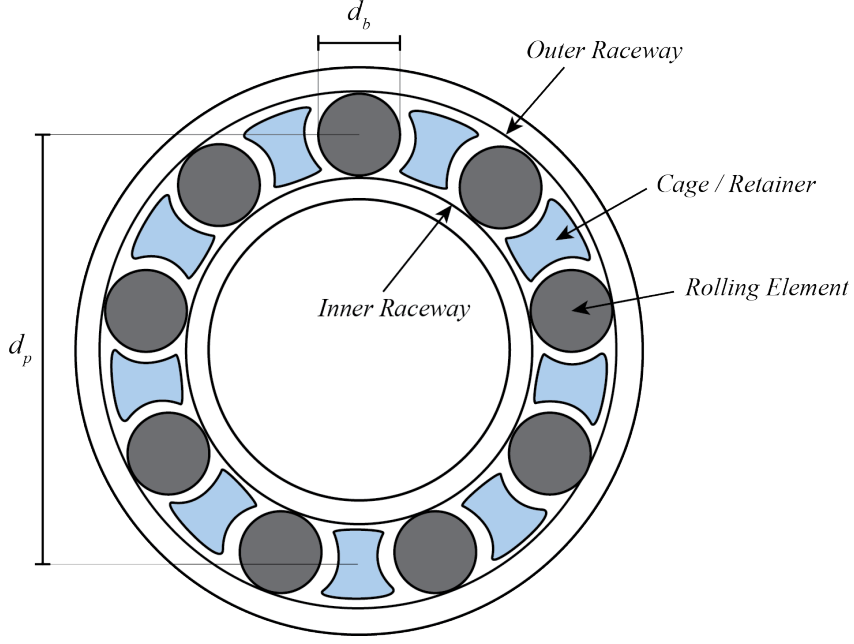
Cross-sectional schematic of a typical rolling-element bearing.
